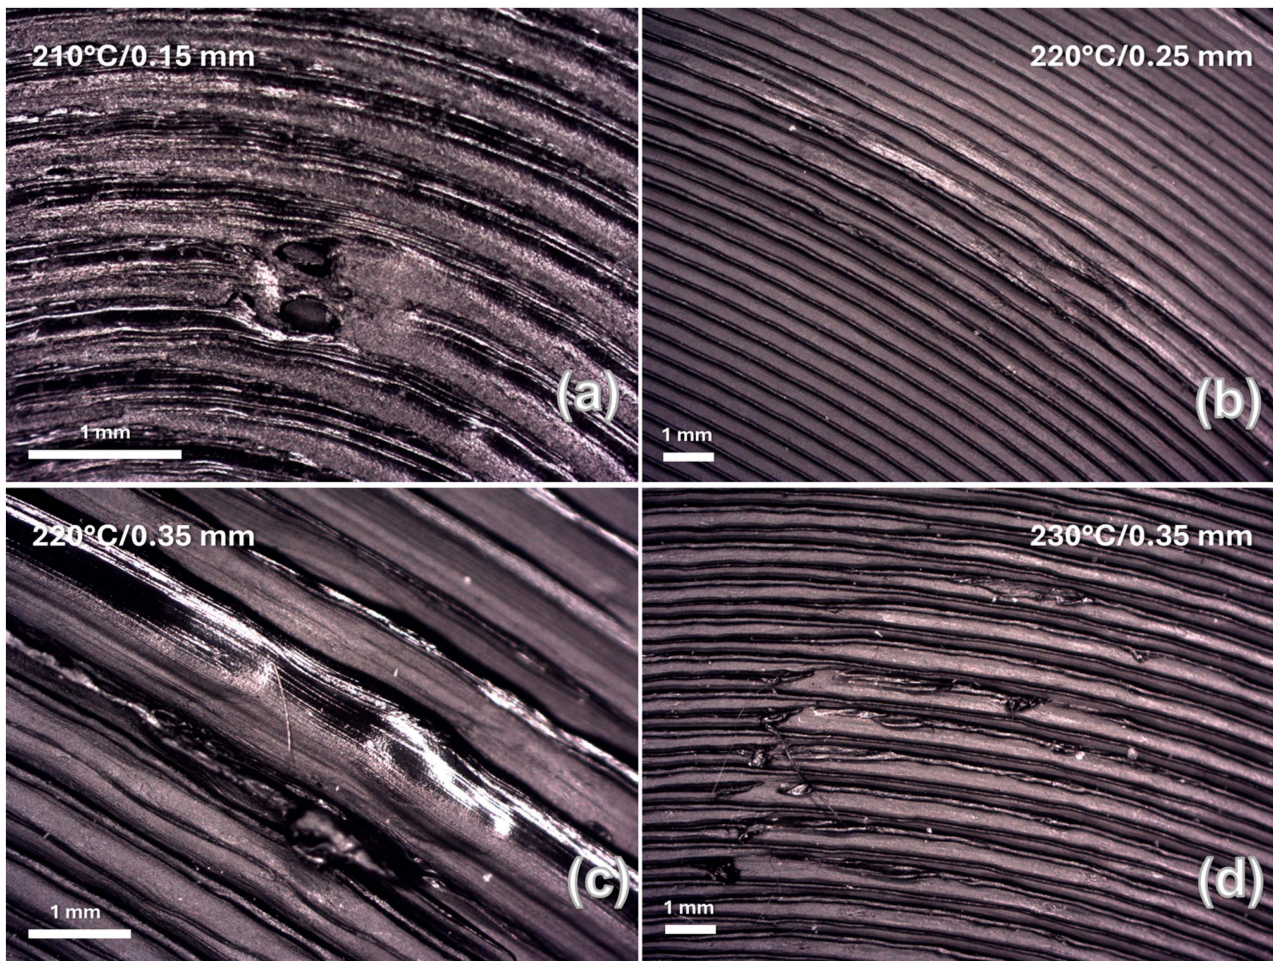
Surface defects of the pieces: (a) porosities at 210 °C and 0.15 mm layer thickness. (b) Flow defect at 220 °C and 0.25 mm layer thickness. (c) Flow defect at 220 °C and 0.35 mm layer thickness. (d) Material accumulation at 230 °C and 0.35 mm layer thickness.
